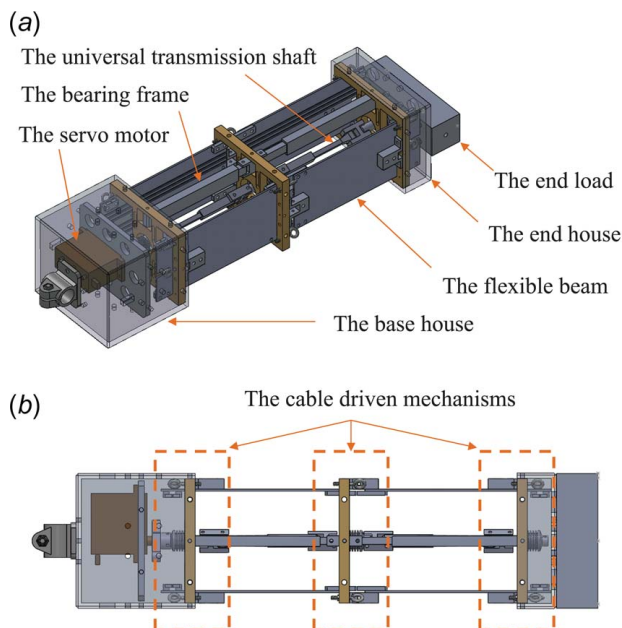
The design of the proposed shape morphing arm: (a) the stereoscopic view of the arm and (b) the top view of the arm (Color version online.)
